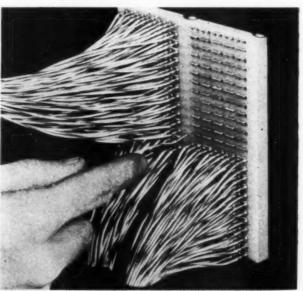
An example of the extremely large number of connector contacts that may be crammed into a relatively small space by using taper-pin solderless connectors
